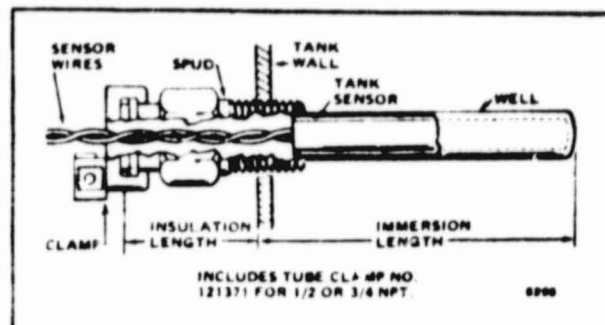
TANK SENSOR INSERTED IN IMMERSION WELL.
